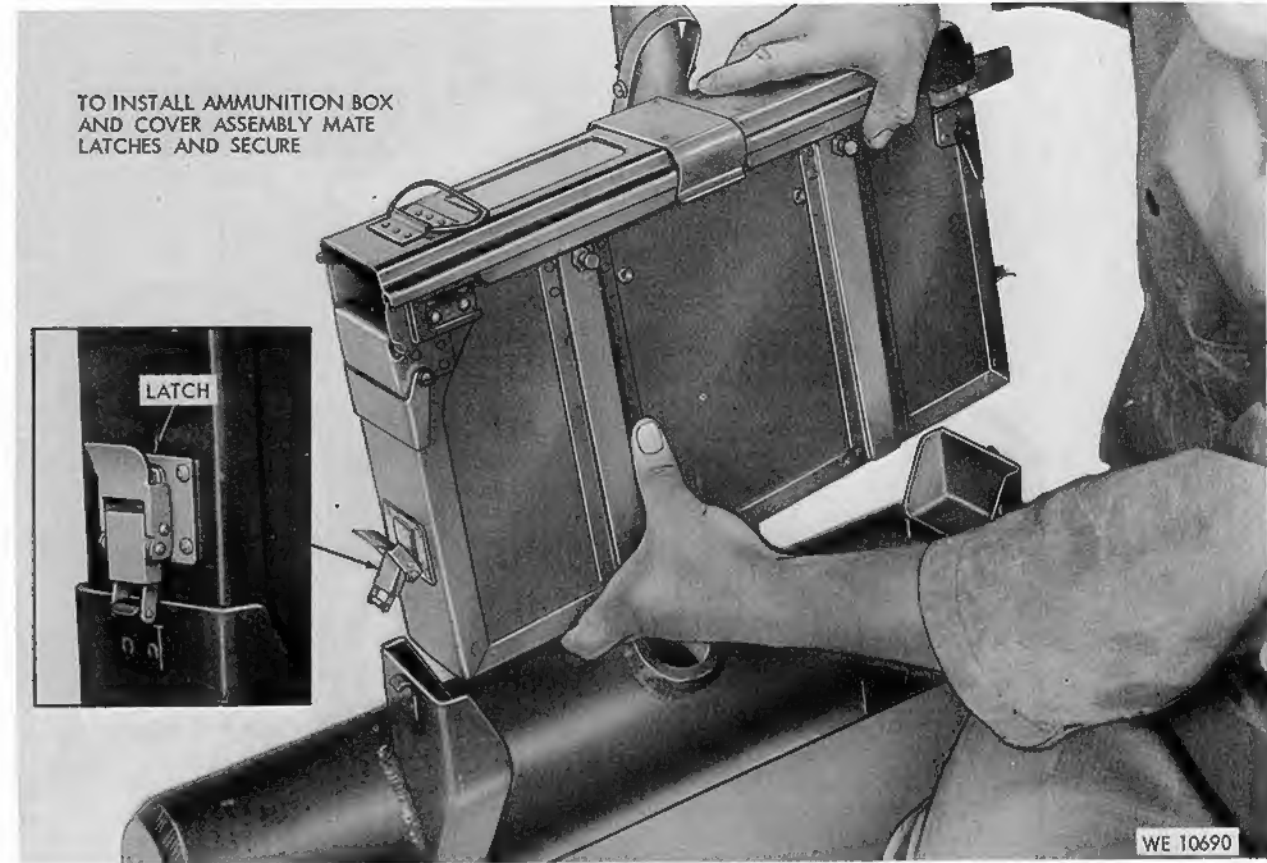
Removal or installation of ammunition box and cover assemblies on mount assembly XM23.
